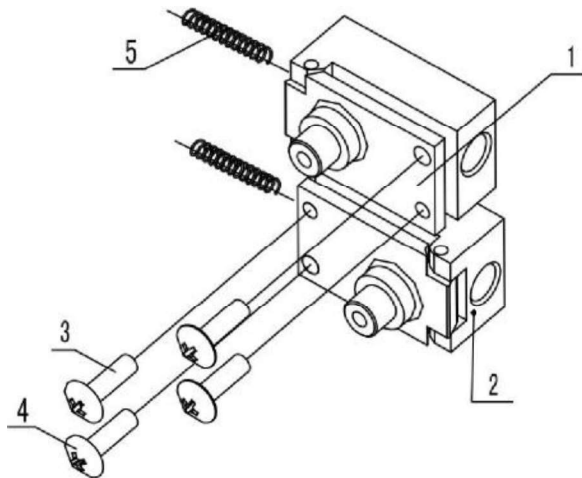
(1) Driven Wheel Seat (Adjusting Block), (2) Driven Wheel Seat (Adjusting Block), (3)/(4) Adjusting Screws, (5) Springs
